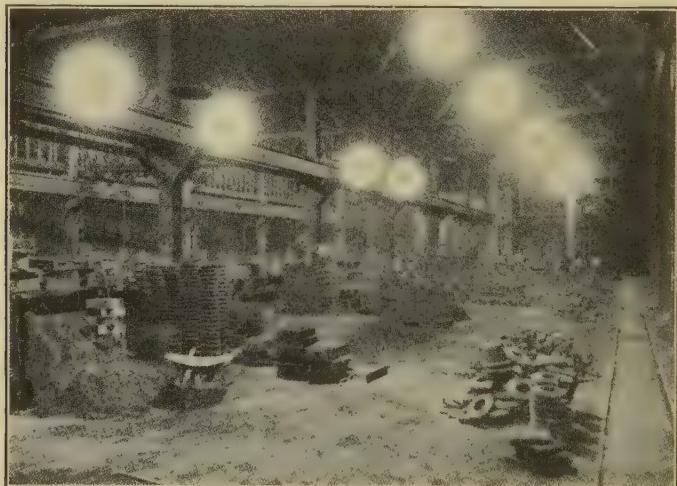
Night view of a well lighted foundry. 300-watt Mazda C lamps in RLM standard dome reflectors on centers 10 by 40 ft. are mounted on the ceiling trusses, 35 ft. above the floor. An intensity of over five foot-candles is provided.
